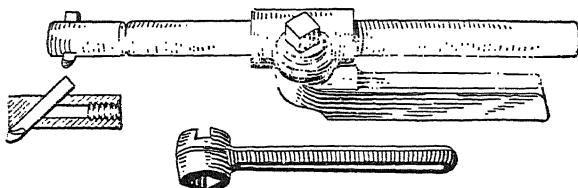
Armstrong boring-tool holder and wrench for adjusting or tightening either the cap or the bar.
